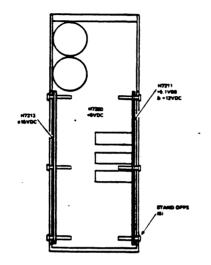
POWER SUPPLY REGULATOR REMOVAL
